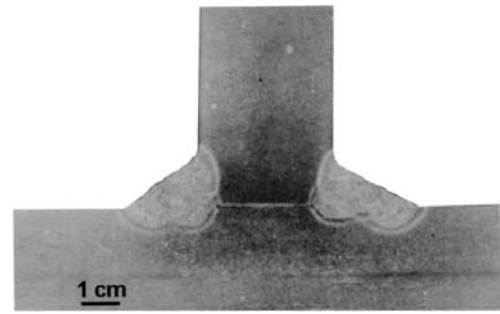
Macrostructure of a MF-300/US-40 weld made in accordance with the welding conditions shown in Table 4.
